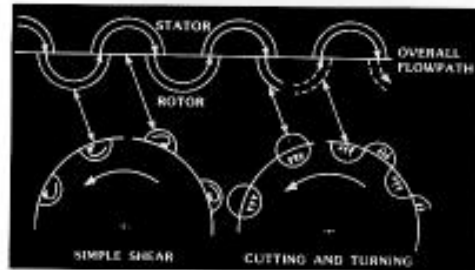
Cutaway of cavity transfer mixer. (Courtesy Davis-Standard)
